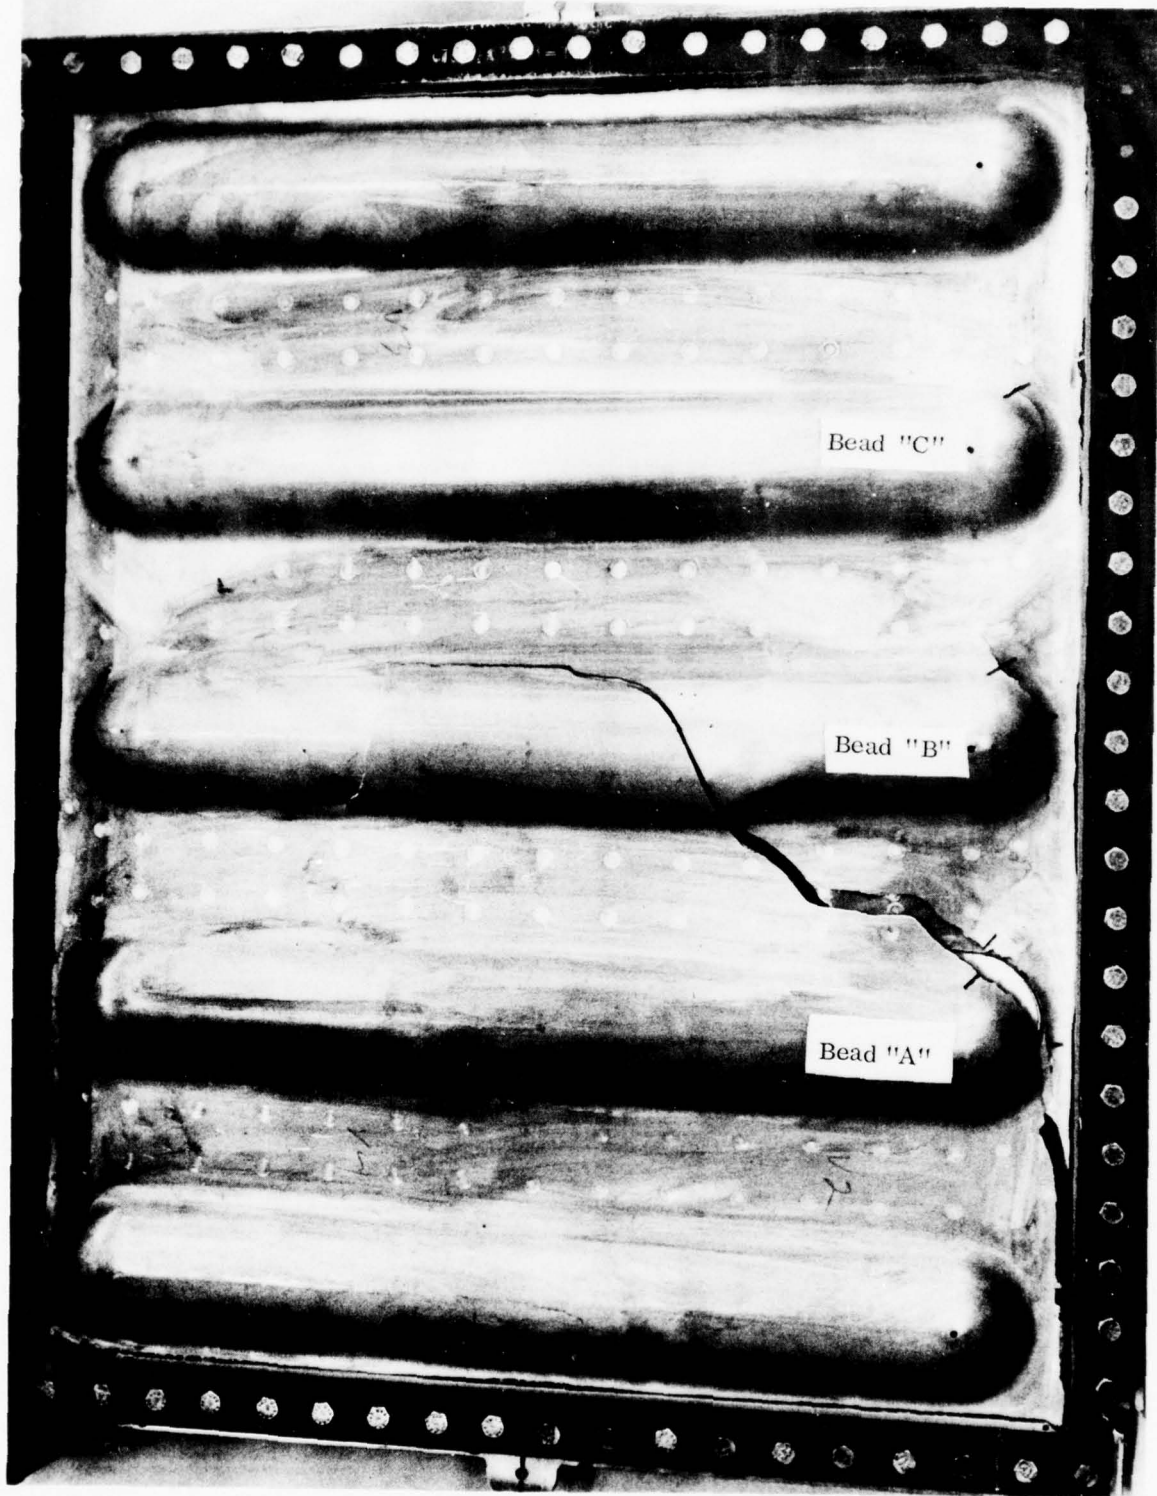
WELDBONDED PANEL, BEAD SIDE,
